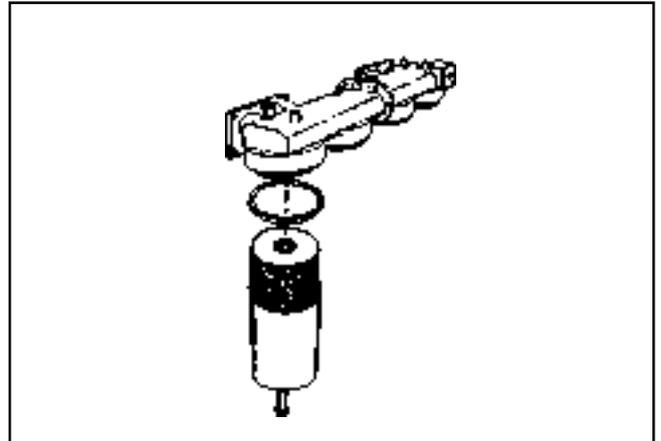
Changing L.O. element on KV-12/KV-16 engines.
